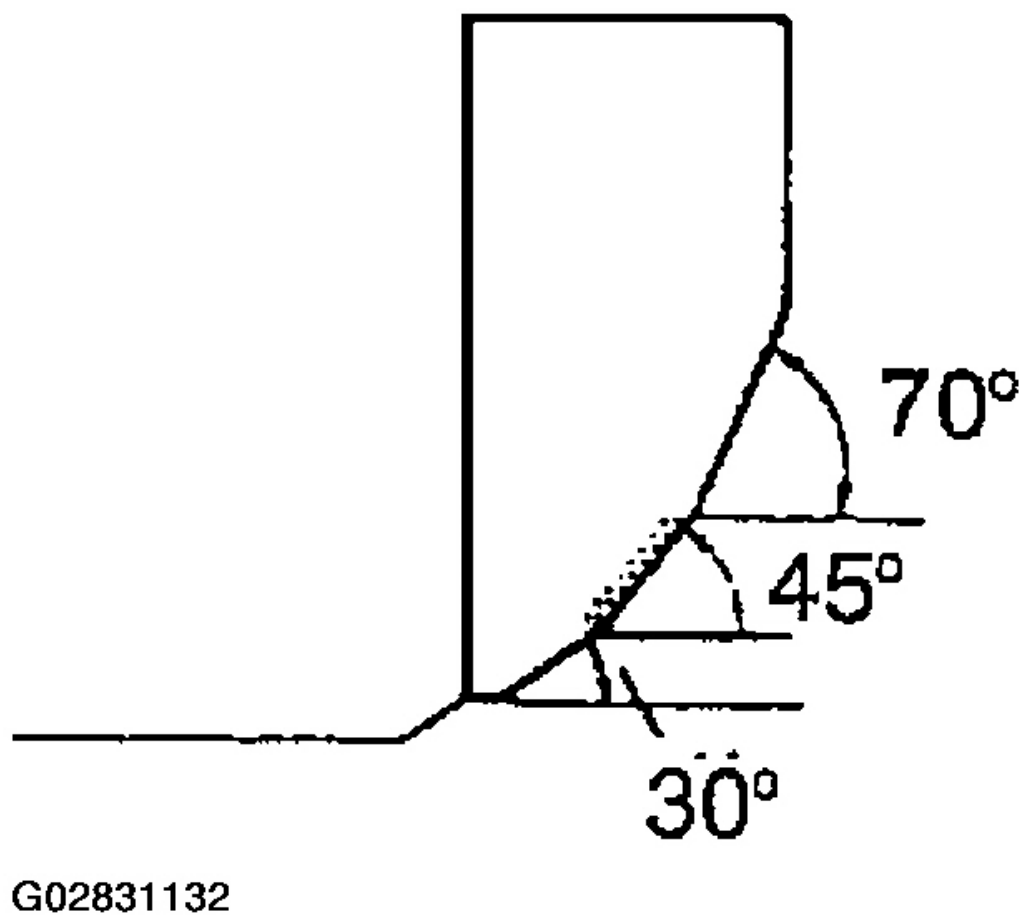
Identifying Valve Seating Position At Center Of Valve Face
